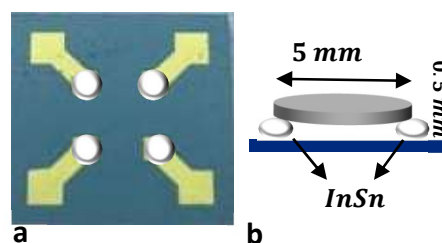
(a) Top view and (b) Side view of soldered InSn on a silicon substrate.
